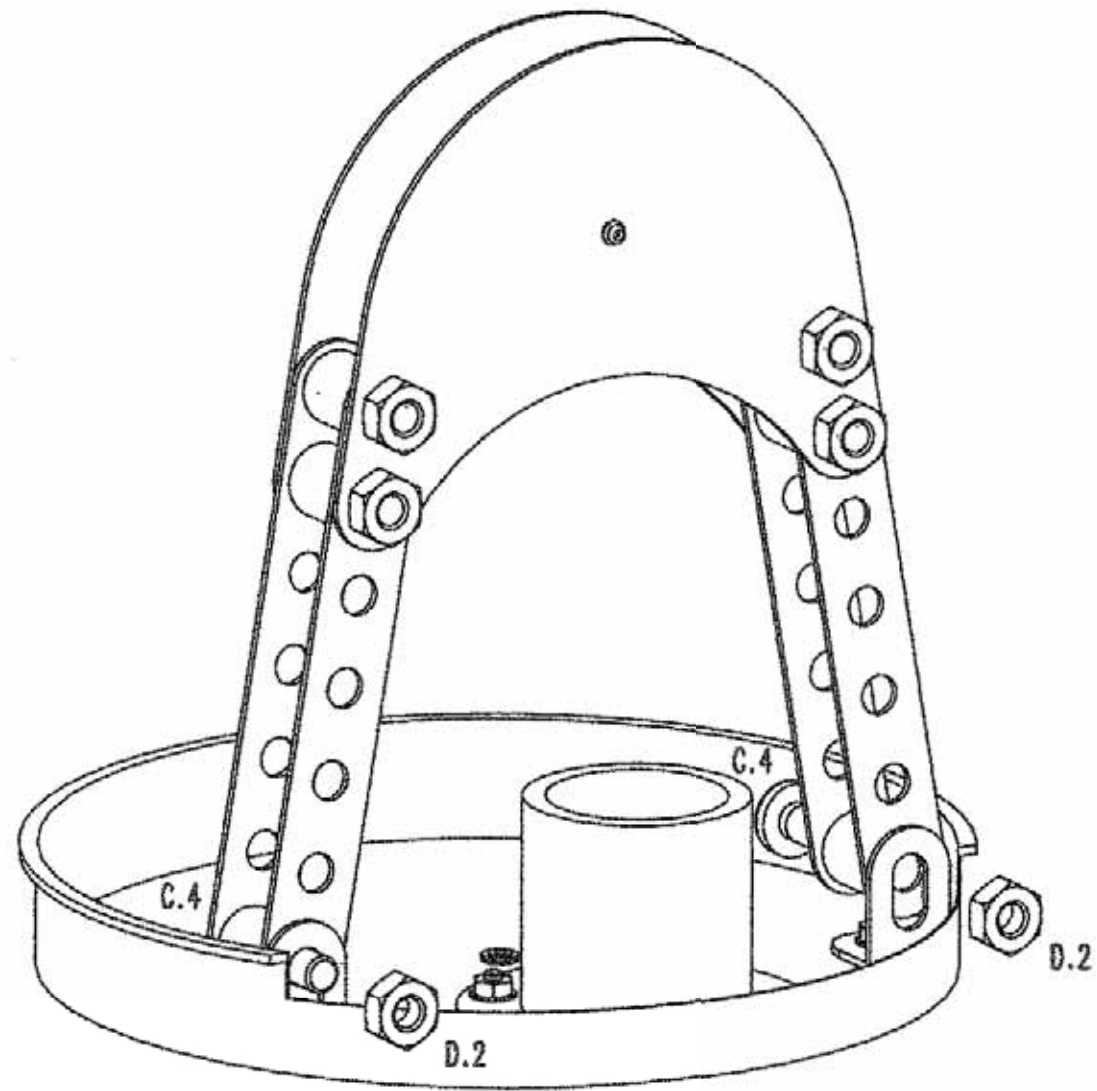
Connection of the Propeller Blades to the Crank Disc
